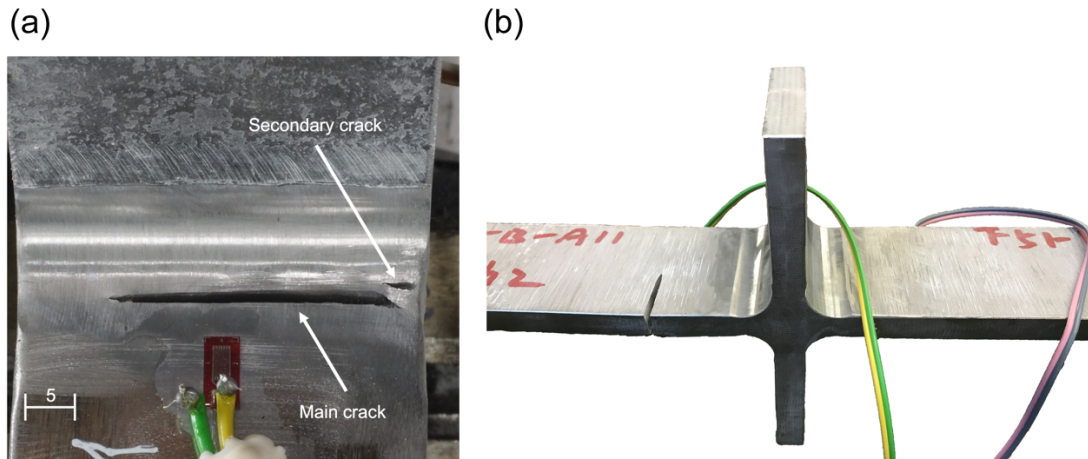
Failure location in weld profiled specimens; scale in millimetres
